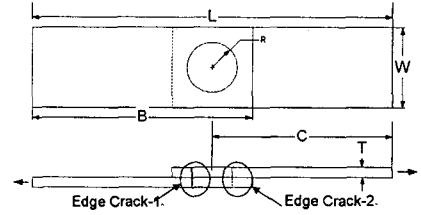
Dimension of specimen of shear-lap model for the fracture analysis
